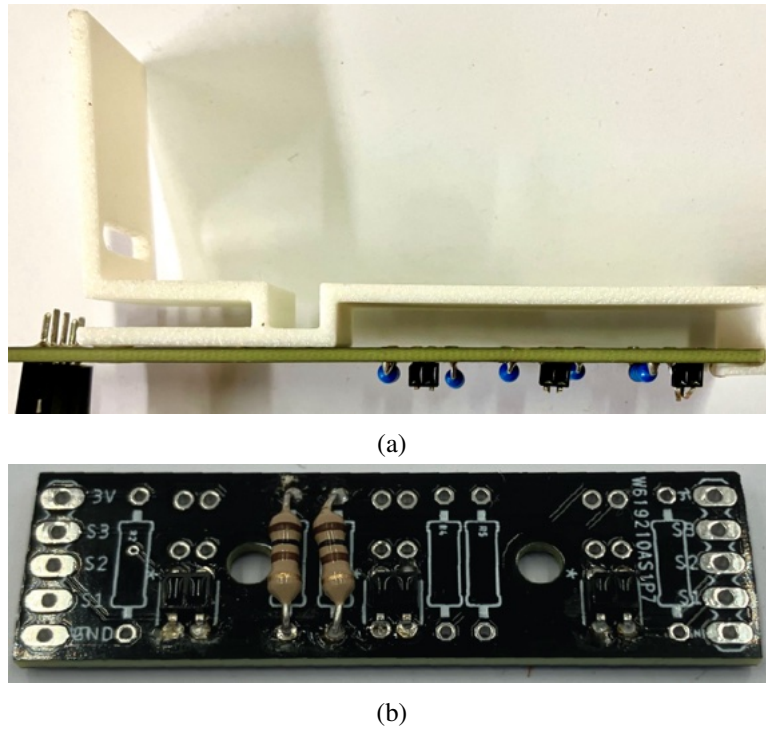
(a) Prototype PCB attached to 3D-printed adjustment bracket. (b) Vertically oriented prototype sensor PCB.
